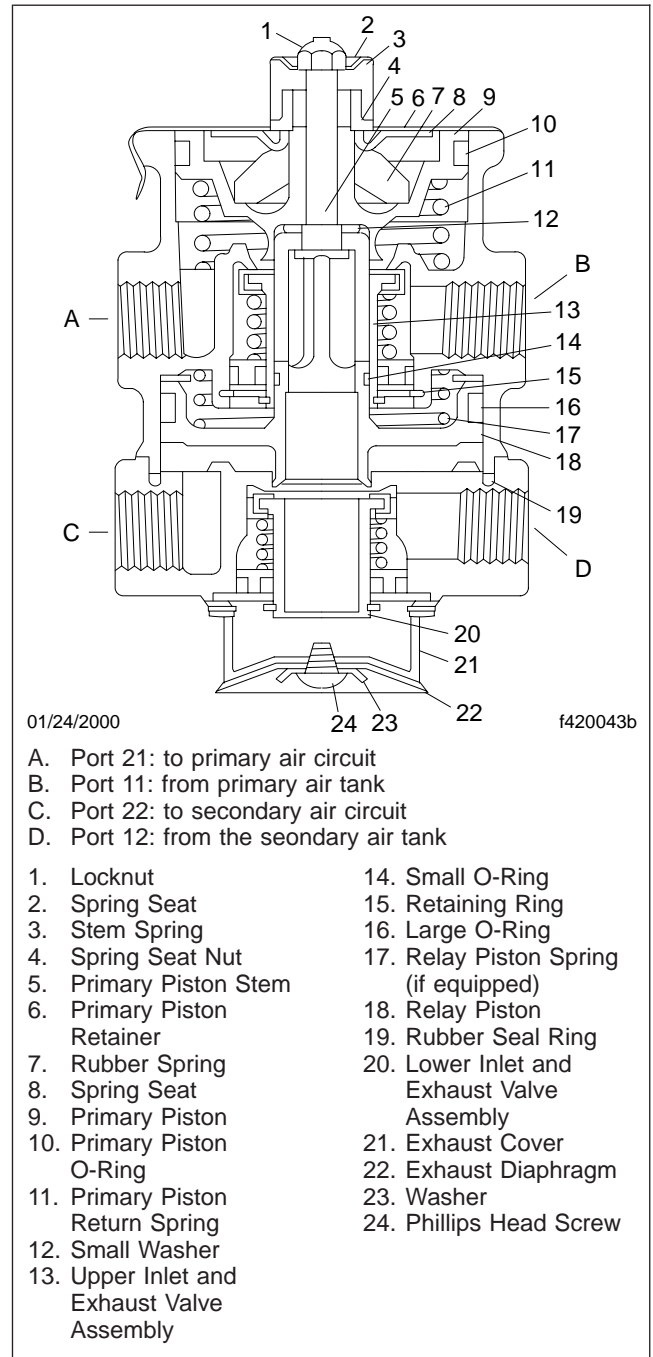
, Bendix E-6 Dual Circuit Foot Valve (sectional view)
